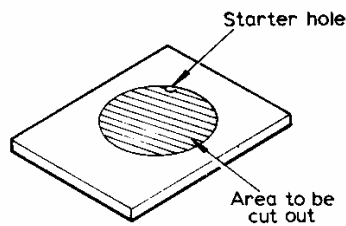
To cut a hole in a piece of wood, bore a starter hole first
